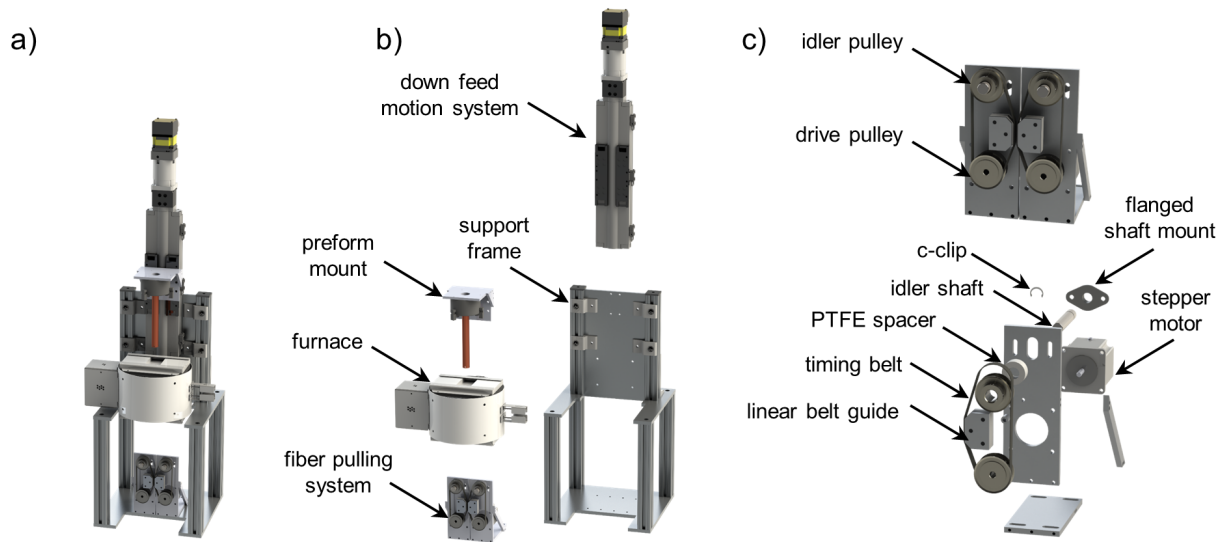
a) Rendered schematic of the BDT assembly. b) Exploded view highlighting the primary BDT subassemblies. c) Collapsed and exploded views of the fiber pulling tractor system.
